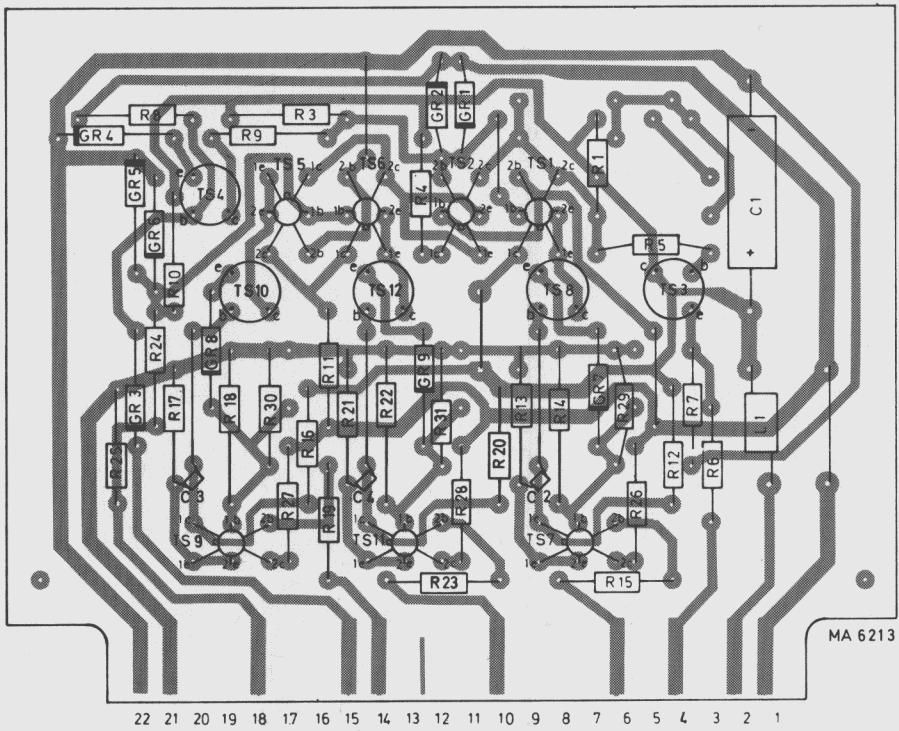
Printed wiring board, video mixer, unit 11A, 11B and 13A
